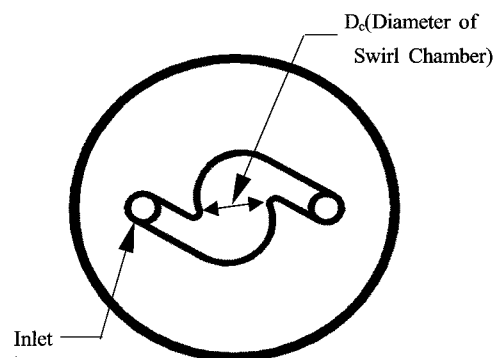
Bottom view of experimental nozzle core. -type 1-
